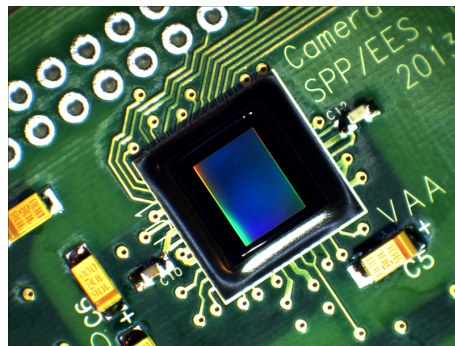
Closeup of the image sensor mounted on a specially made PCB.
